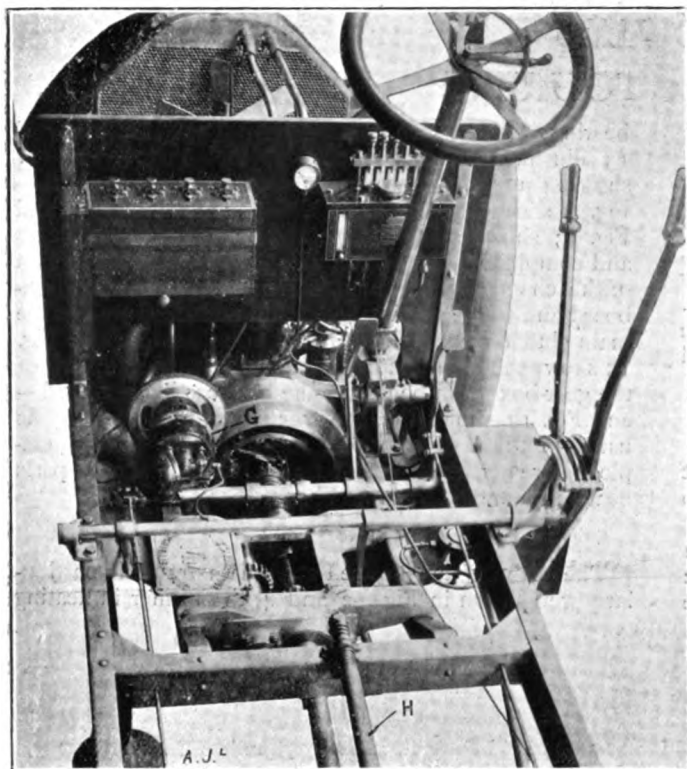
View of the 16-h.p. Métallurgique Chassis, showing the internal expanding clutch, the frictionally driven charging dynamo, G, and the spring-suspended torque-rod, H.
